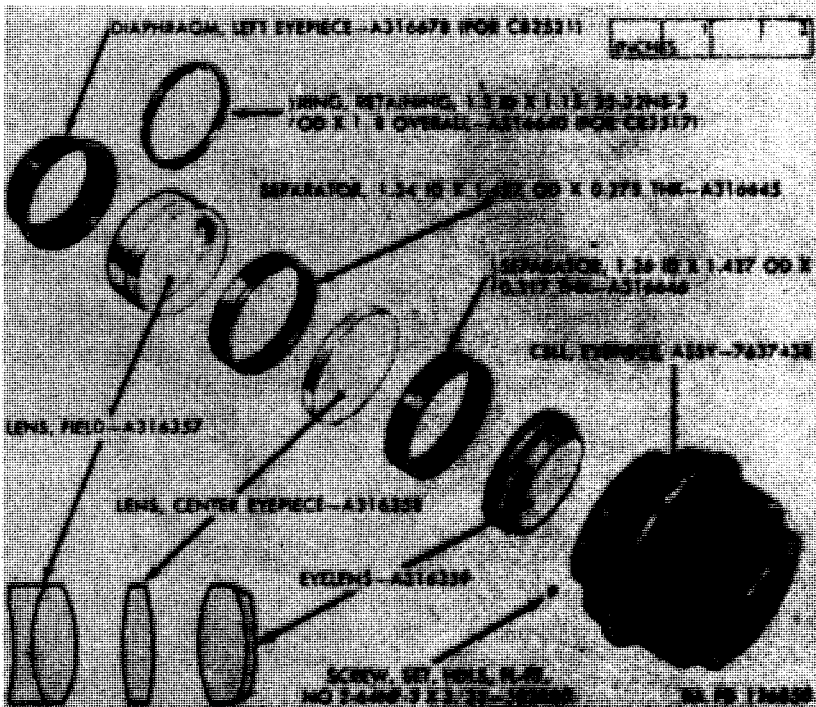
Eyepiece assembly C82517 (right) or C82512 (left) - exploded view.
